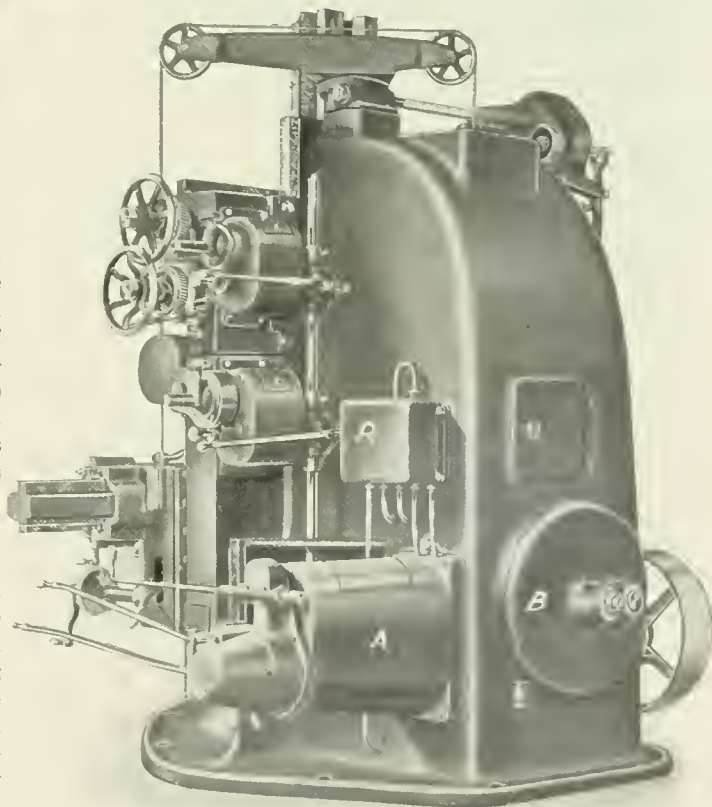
Rear View of the Bullard Vertical Turret Lathe
